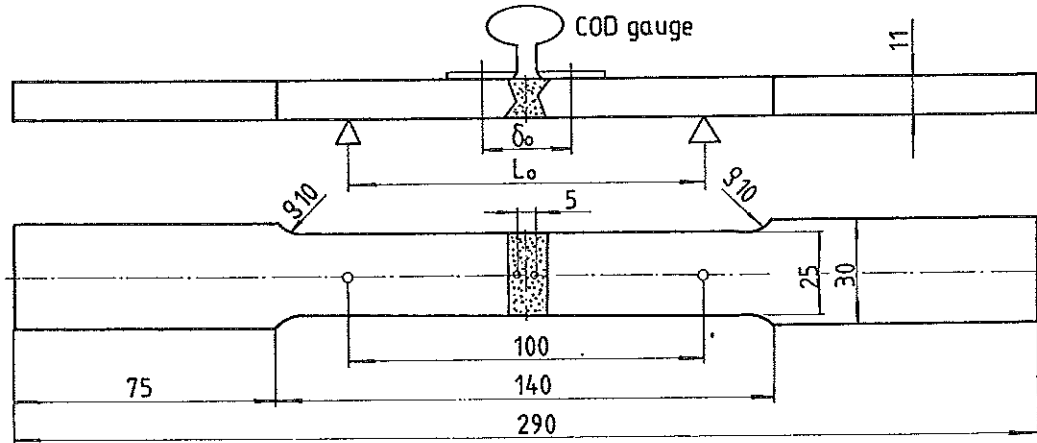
Welded joint specimen with mounted COD gauge for determination of initial plastic deformation in weld metal
